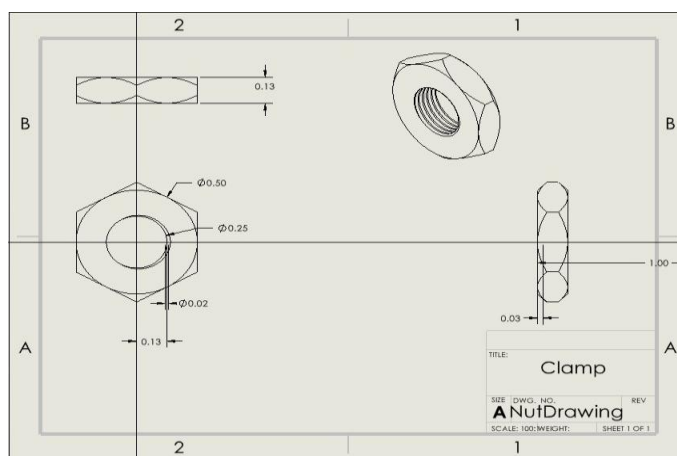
3D dimensioned drawing of nuts utilized in the clamp
